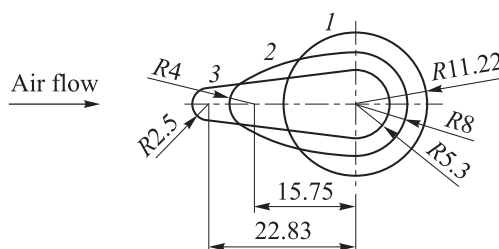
Cross-sections of a circular (1); cam-shaped (2); drop-shaped tube (3)
